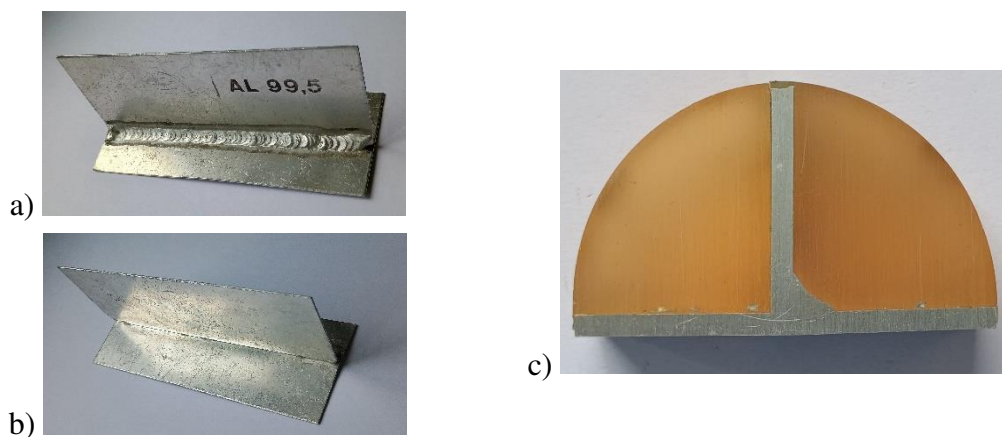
T-joint with single-sided fillet weld of 1 mm thick sheets using the MIG method: a) weld face, b) weld root, c) metallographic section.
